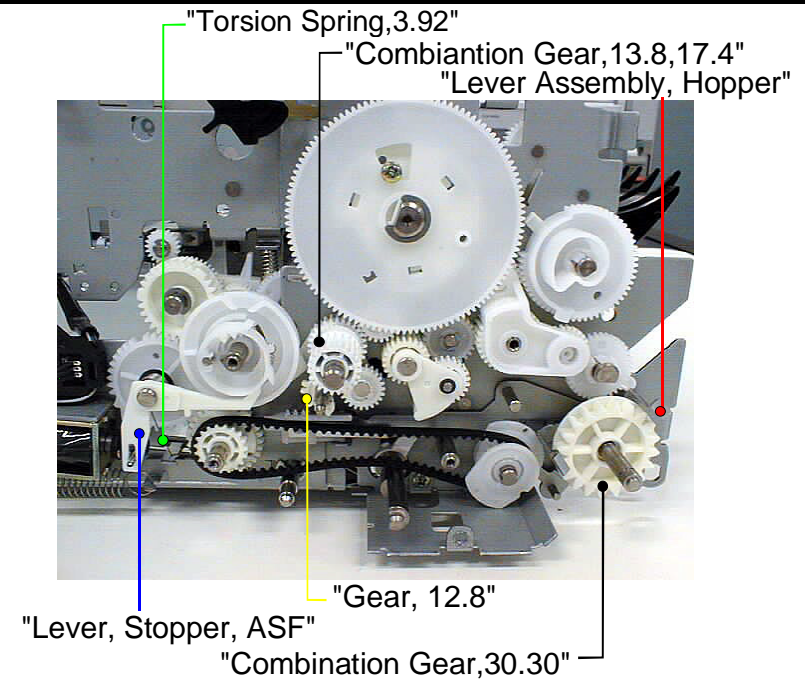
"Lever, Stopper, ASF" ,"Combination Gear 13.8.17", "Lever, Stopper, ASF", "Gear,12.8", "Combination Gear,13.8, 17.4", "Lever Assembly Hopper" Removal
